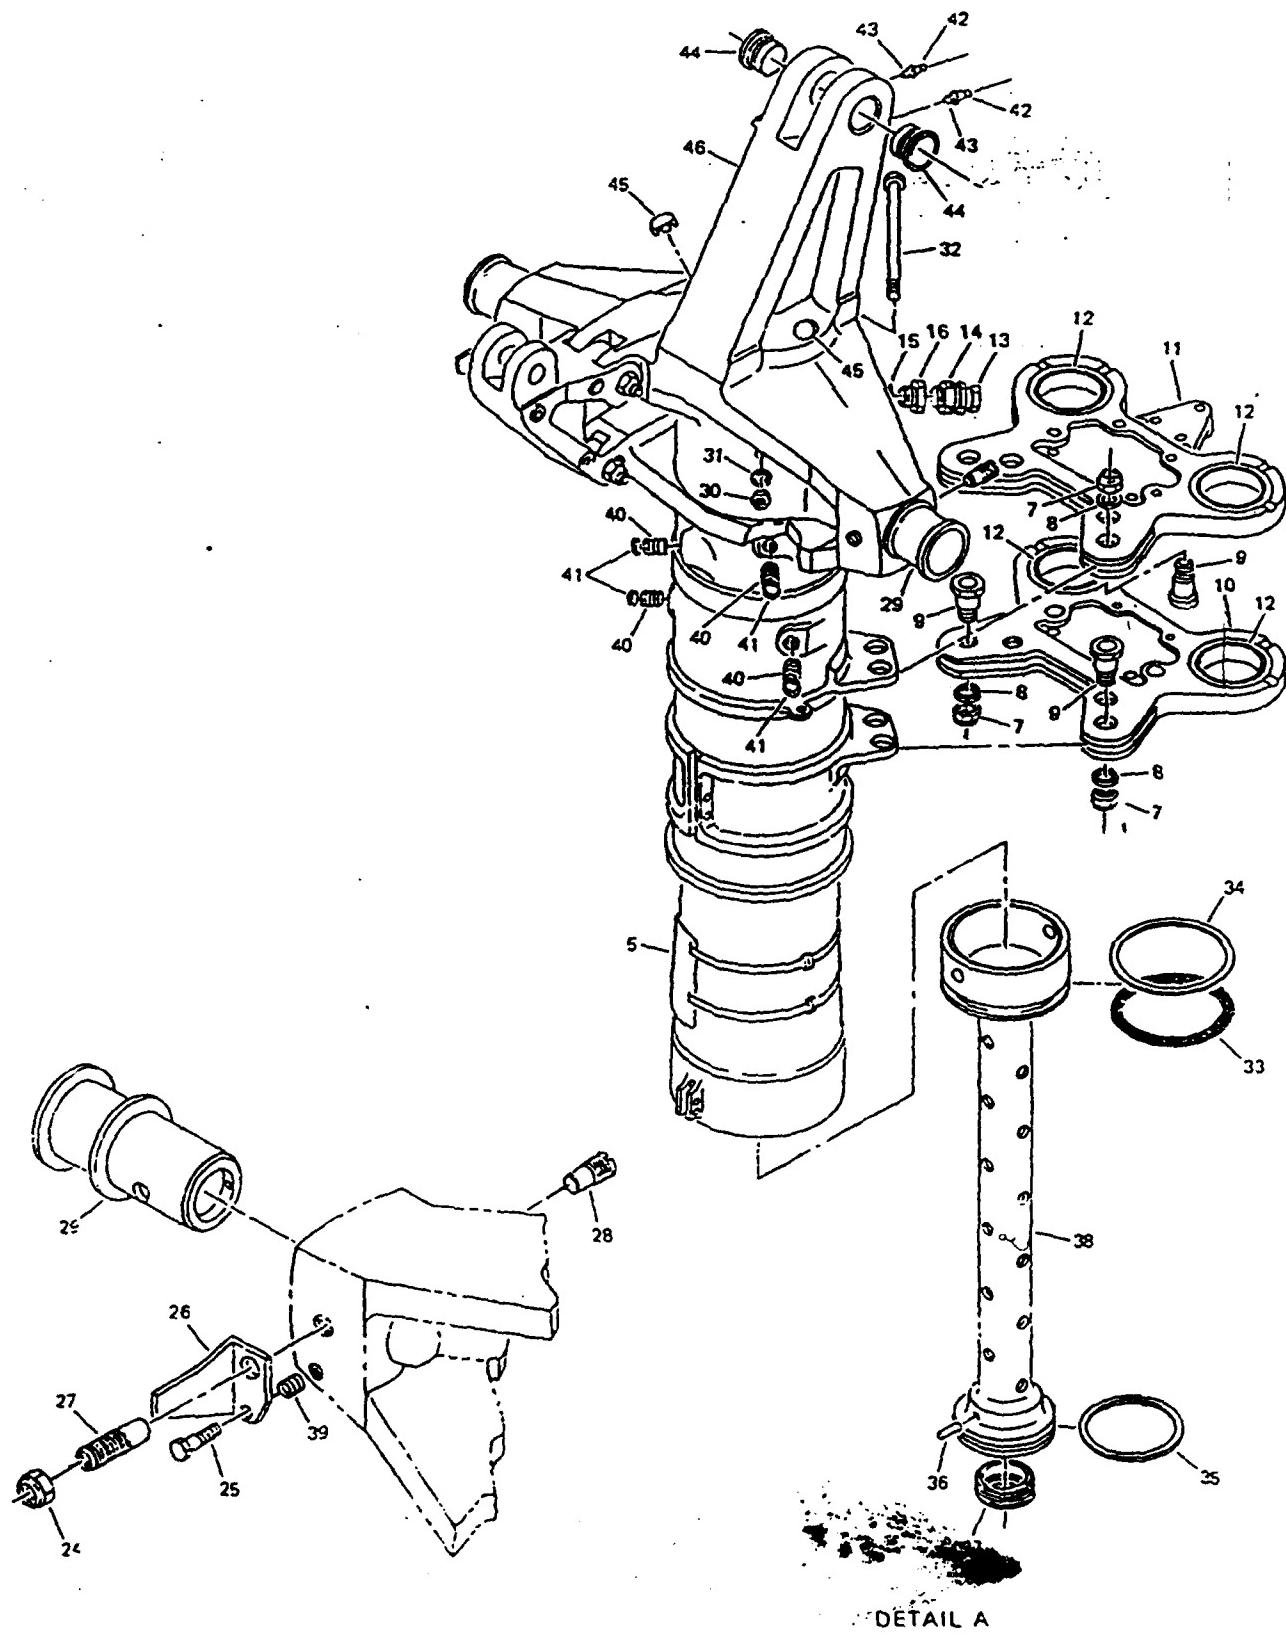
Nose Gear Oleo Assembly (Sheet 2 of 3)
